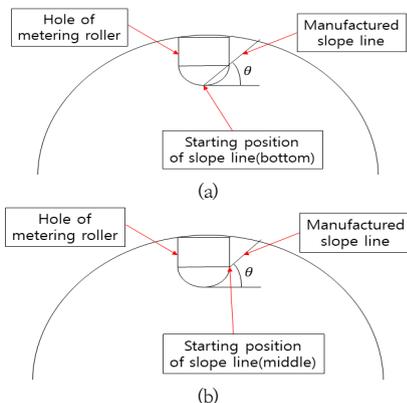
Schematic diagram of hole of improved metering roller. (a) bottom type (b) middle type
